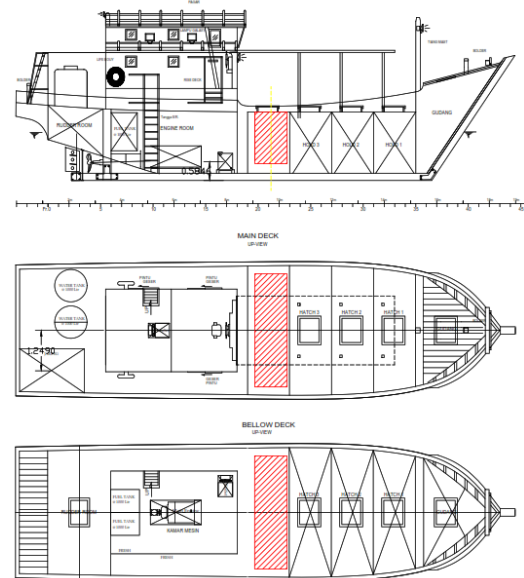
Illustration of Passive Free Surface Tank Placement on KM Barokah Rezeki
